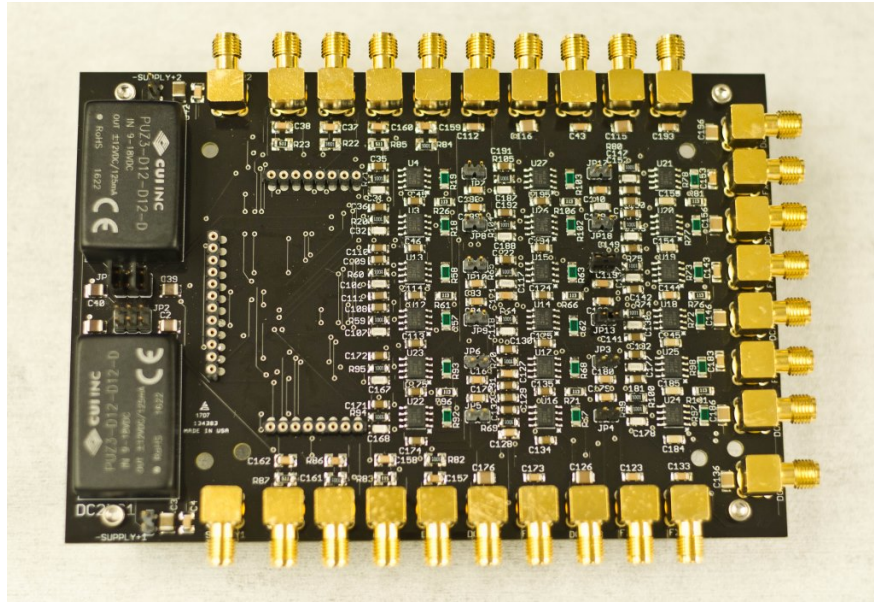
Assembled bottom PCB with forcer and carrier channels for 3 gyroscopes and 3 accelerometers.
